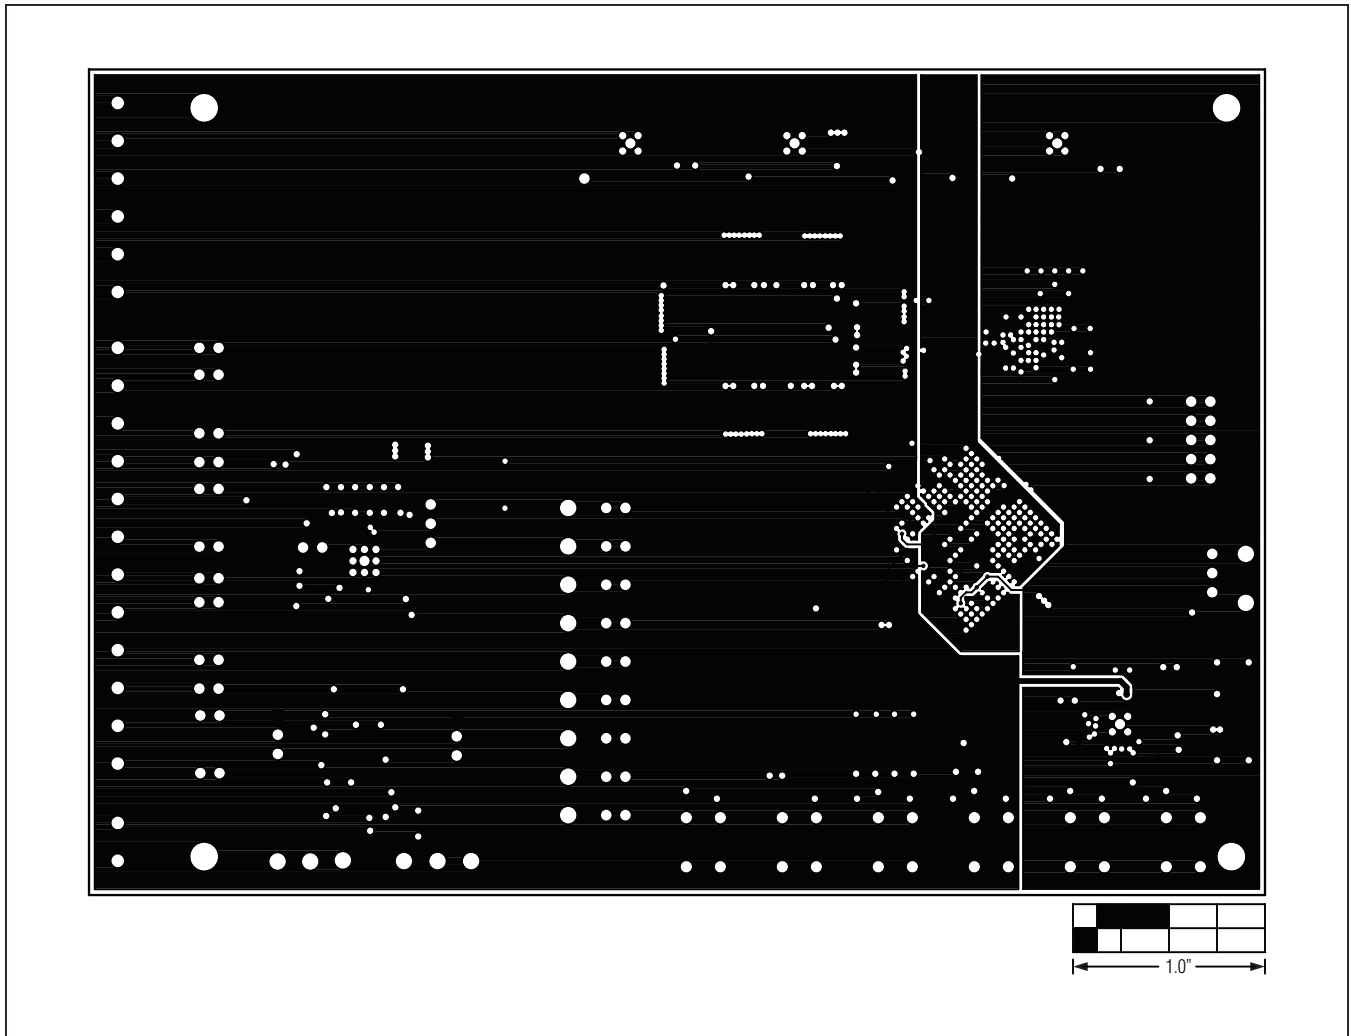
MAX11043 EV Kit PCB Layout—Signal Layer 6
